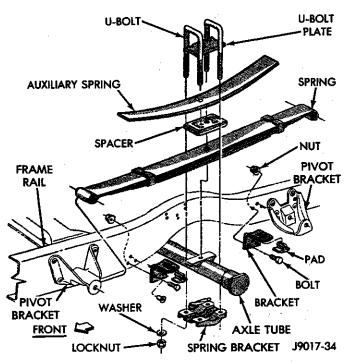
Rear Spring & Auxiliary Spring — D-150 Vehicles
